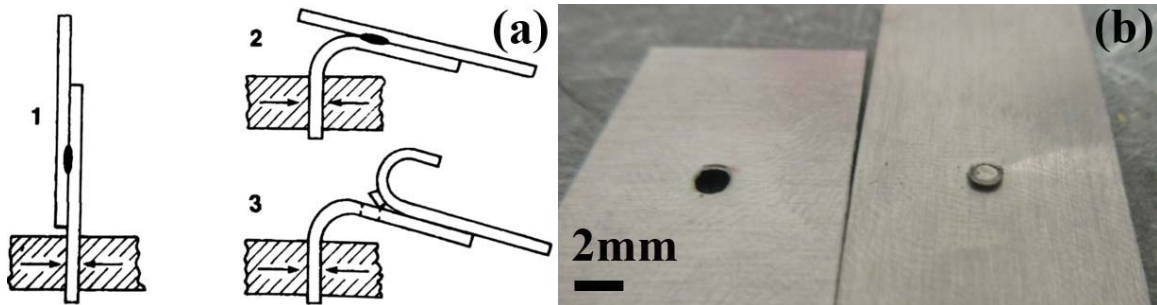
(a) Peel Test³, (b) Peel Test with Acceptable Weld used in this Thesis
